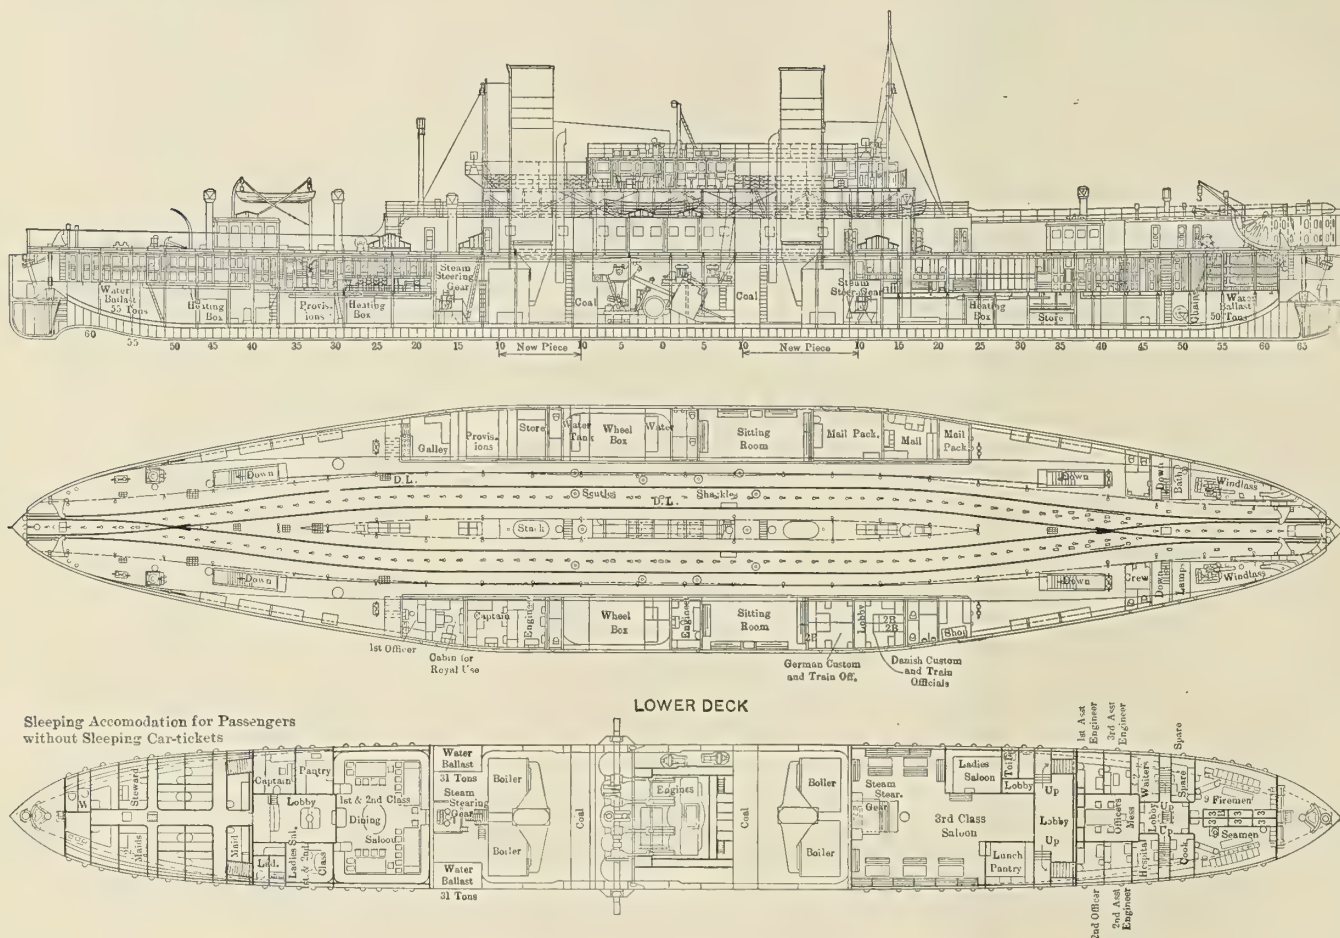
PROFILE AND DECK PLANS OF BALTIC FERRY PRINSESSE ALEXANDRINE.
